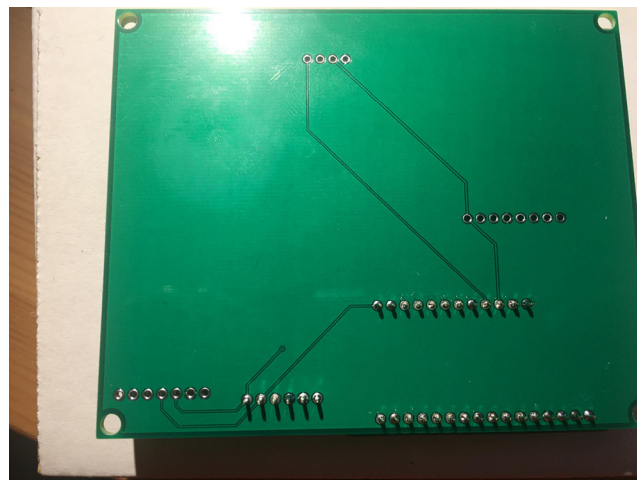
Bottom view after soldering the Lux Sensor to the PCB.
